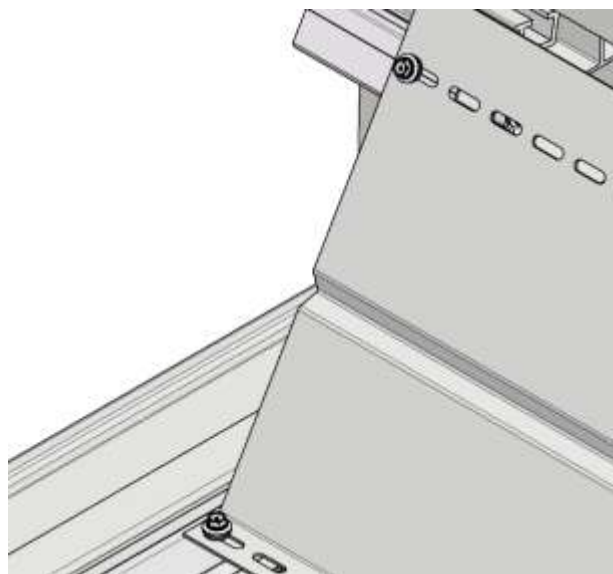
Wind plate mounted on the edge with Self-Drilling-Screw 4.8x19
